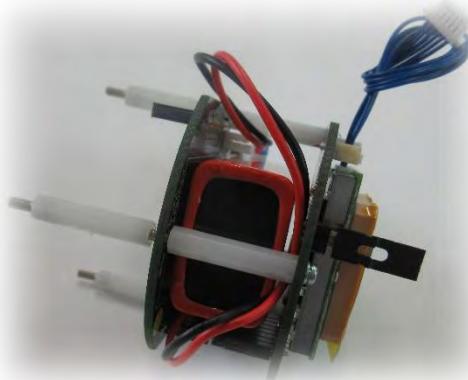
Assembly of the PWR and 3×20 mm spacers to the GPS board subassembly: PWR-GPS subassembly.
